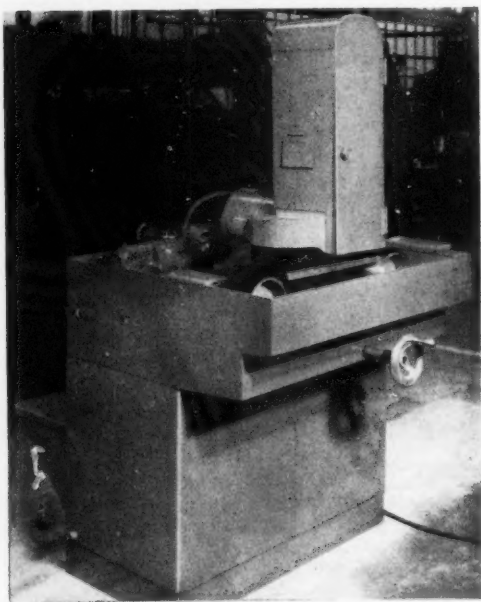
Churchill-Curtis Type 304C conveyor-type abrasive-belt grinding machine
